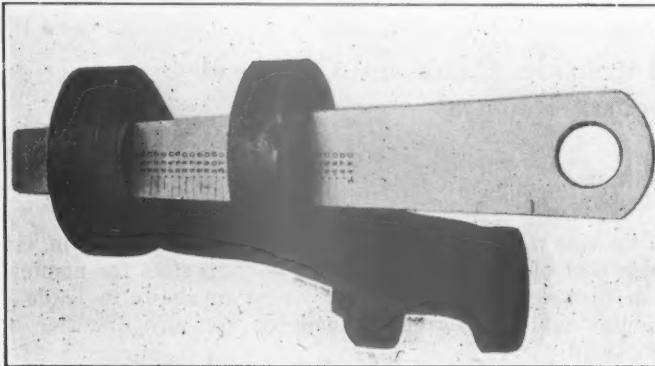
Gage for Measuring Taper Holes and Checking Their Accuracy
